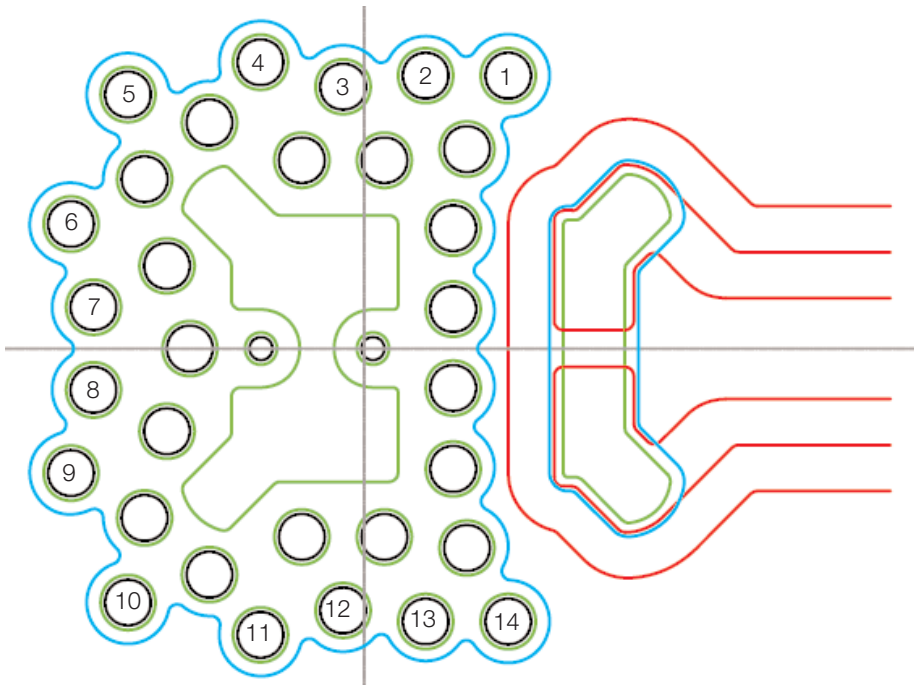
Outline of recommended layout pad for LUXEON Rebel with copper layer (red), photolithographic solder mask (green), white solder mask (blue, optional), drill holes (black), and solder stencil (blue hatched). Please note that there is a 0.5 mm spacing between the thermal and electrical pads.
